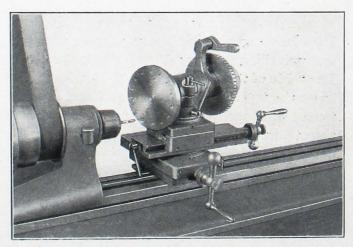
Milling Attachment Index Head on compound slide rest, drilling equally spaced holes at an angle.
